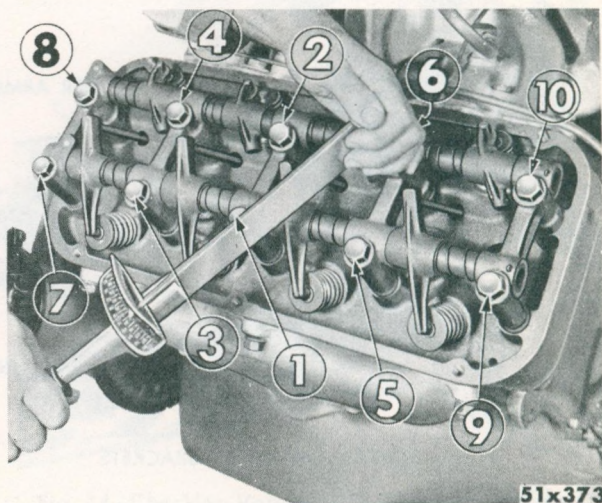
Tightening Cylinder Head Bolts (FirePower)
